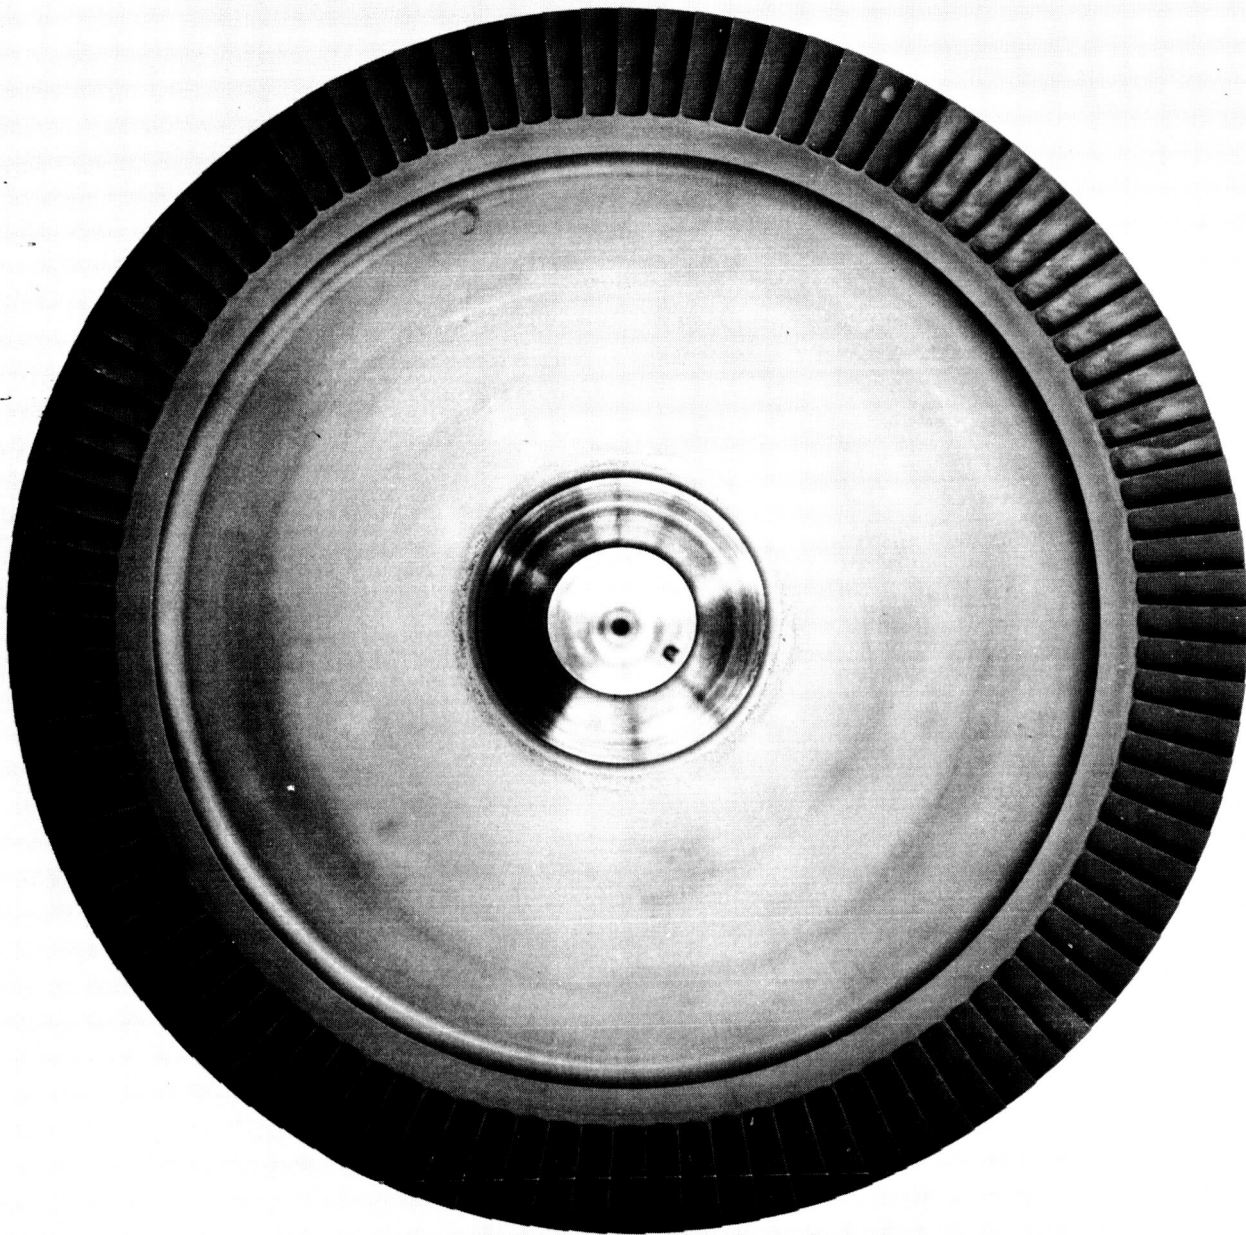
TURBINE WHEEL - INLET SIDE
